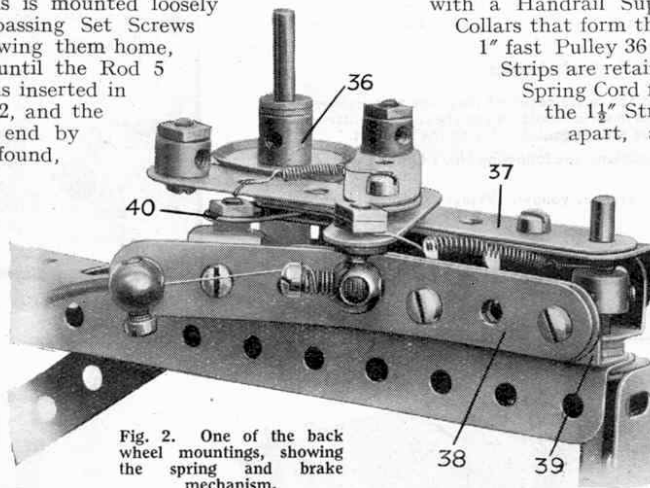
One of the back wheel mountings, showing the spring and brake mechanism.
